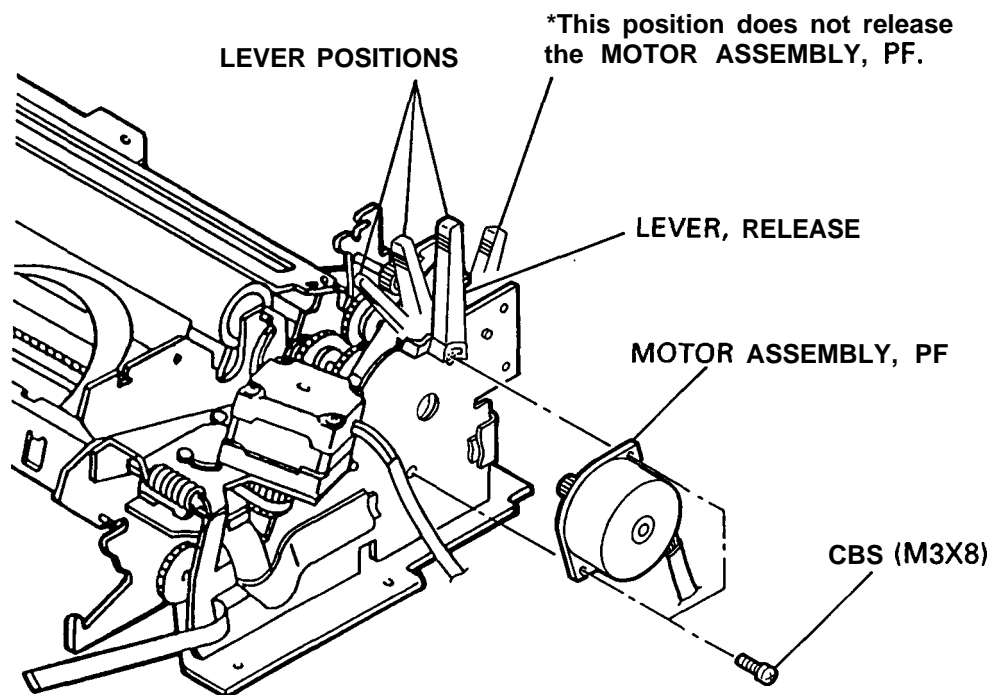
Removing the MOTOR ASSEMBLY, PF
